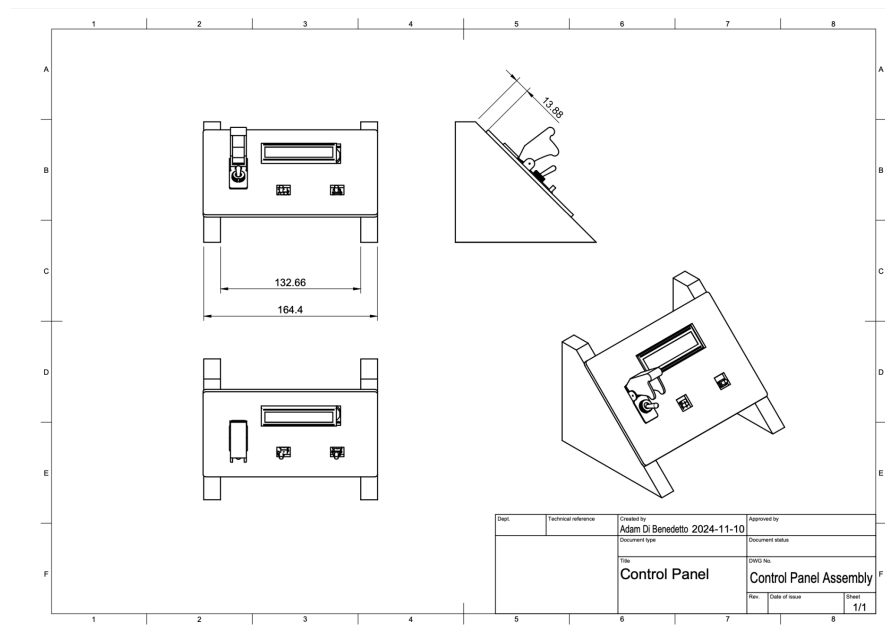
Fusion 360 Drawing of Inverted Pendulum Control Panel Assembly Drawing
